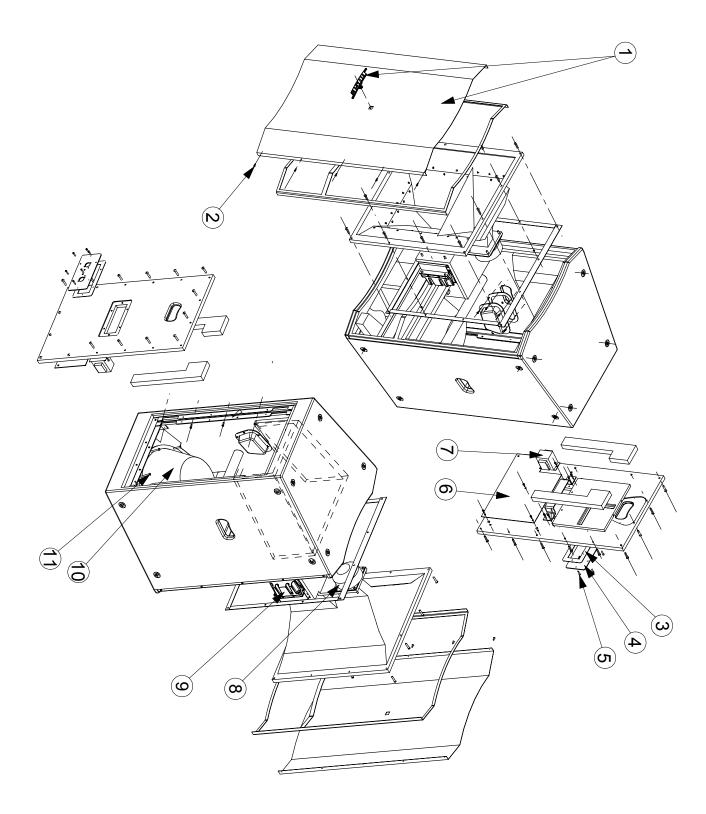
Panaray LT 6403 Loudspeaker Exploded View
